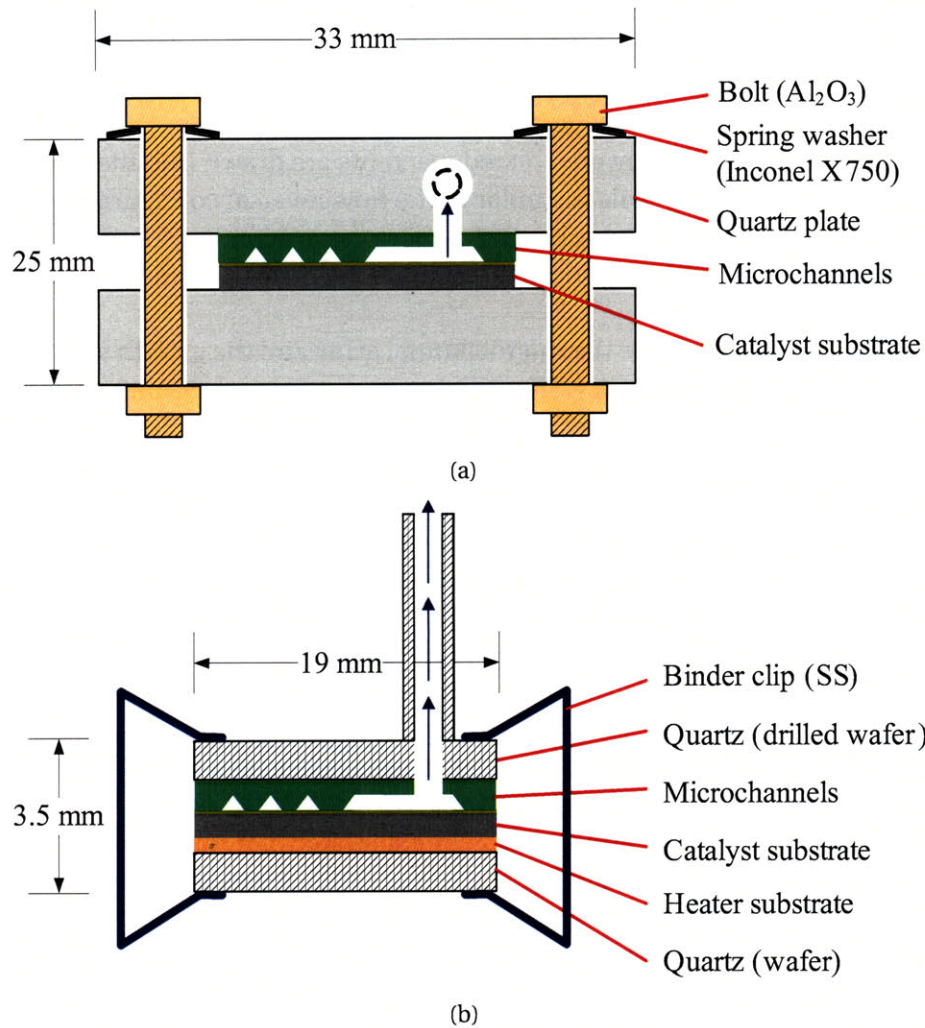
Packages for microchannel array device: (f) fixture for tube furnace where the microchannel array is sandwiched between quartz blocks, preloaded using ceramic bolts and Inconel spring washers; (b) fixture for resistively-heated silicon platform, where the microchannel array is sandwiched between thin quartz plates, and the assembly is preloaded using stainless steel binder clips.
